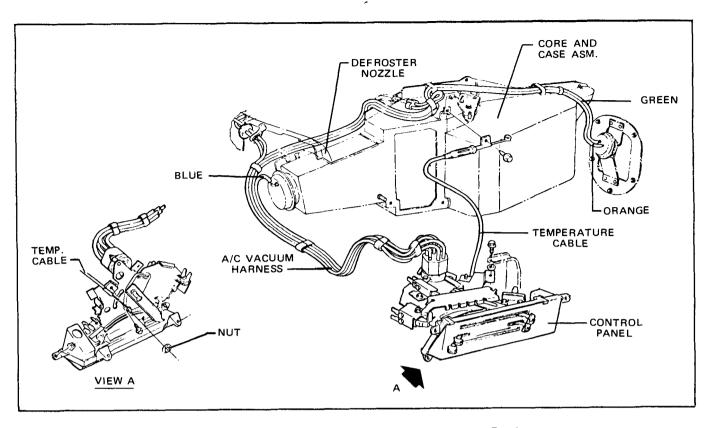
A-125 A Series Control Cable and Vacuum Harness Routing
